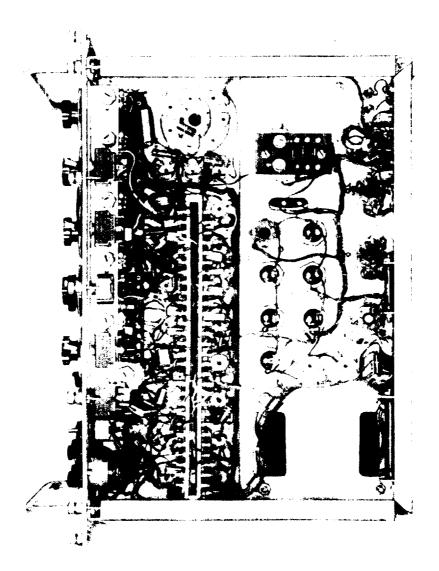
B. Chassis, Bottom View SG-343/UPM-15A
